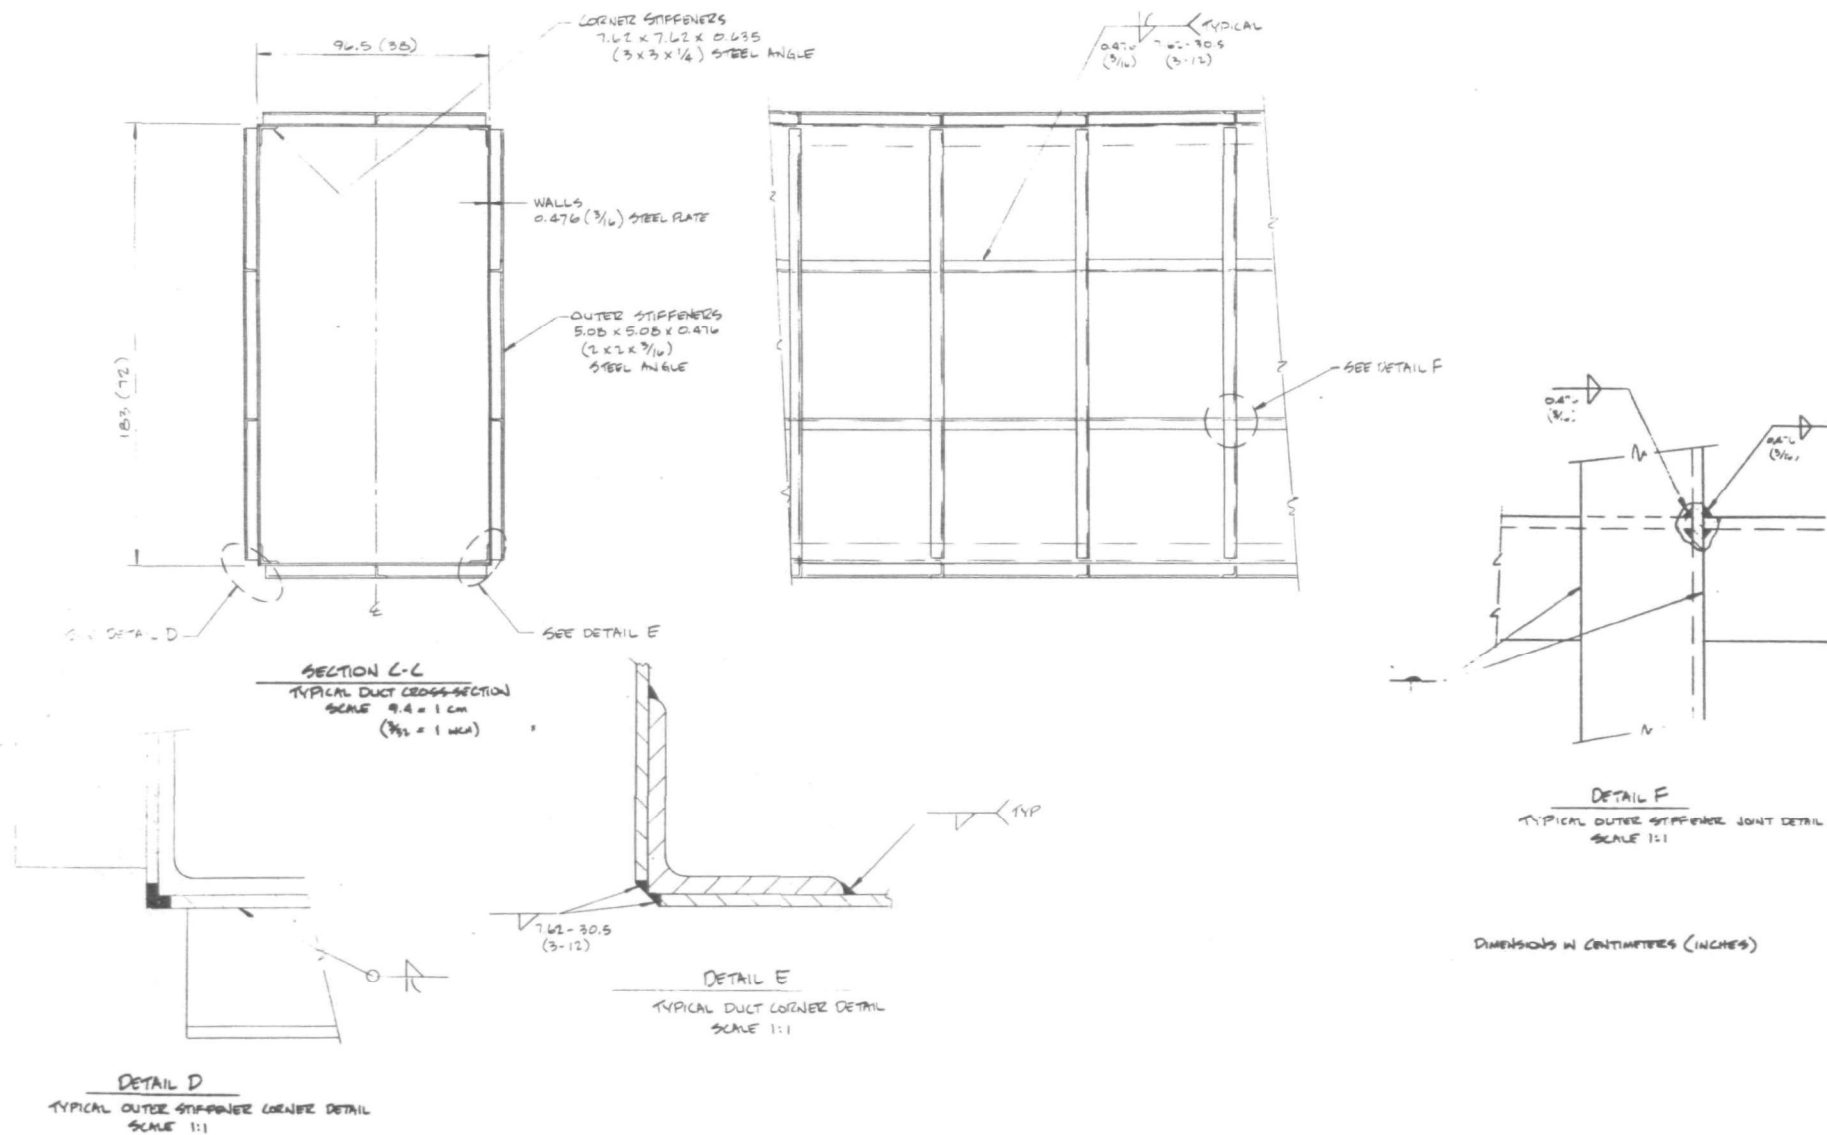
Typical OFA duct detail for tangential coal-fired boilers.
